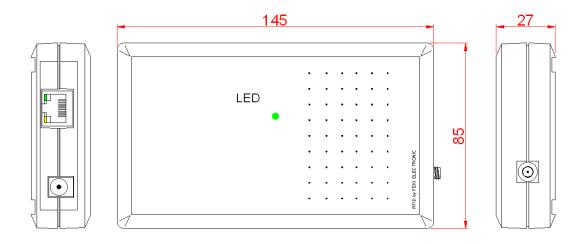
Dimensions oft he housing version (all dimensions are in mm)
